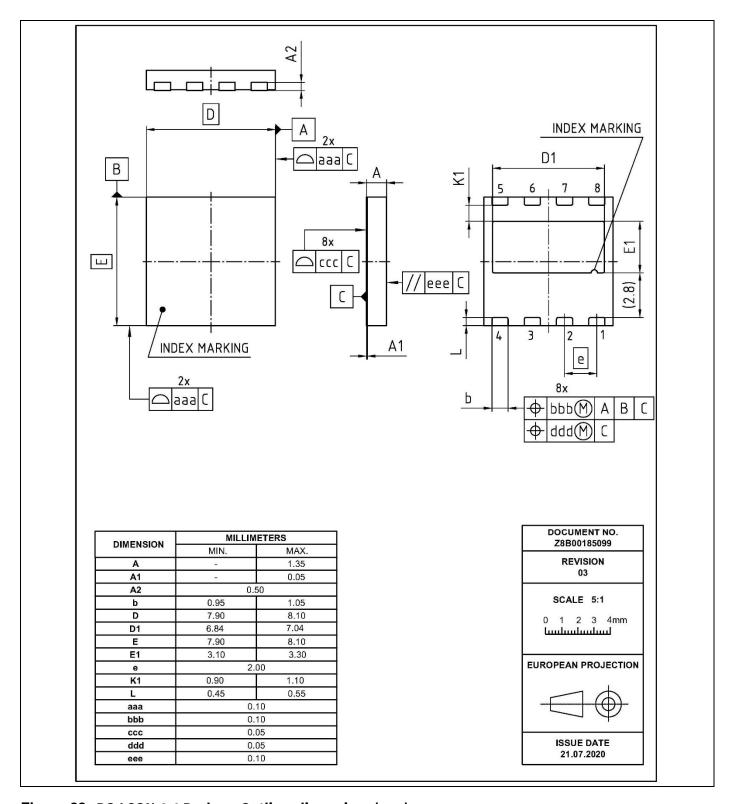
PG-LSON-8-1 Package Outline, dimensions (mm)
